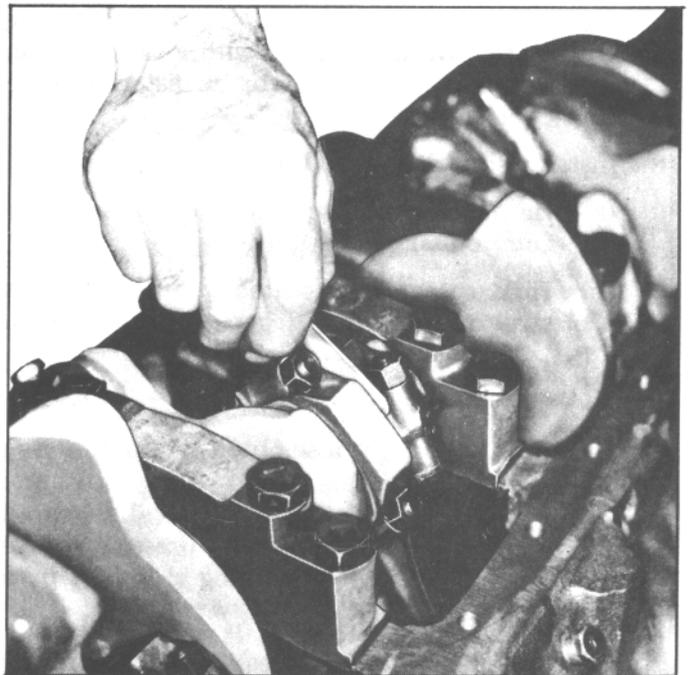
Measuring Connecting Rod Side Clearance (V8)
